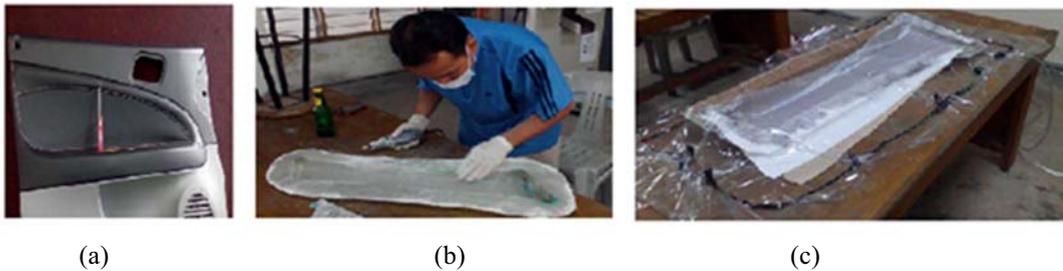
The fabrication of automotive interior parts (a) door panel (b) fabrication of mould (c) fabrication of door panel using VIP.
